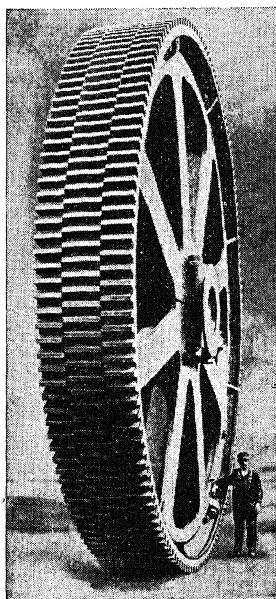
Stepped gears. (Courtesy Mesta Machine Company.)
